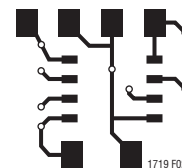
Typical Topside Metal for Multilayer PCB Layouts
